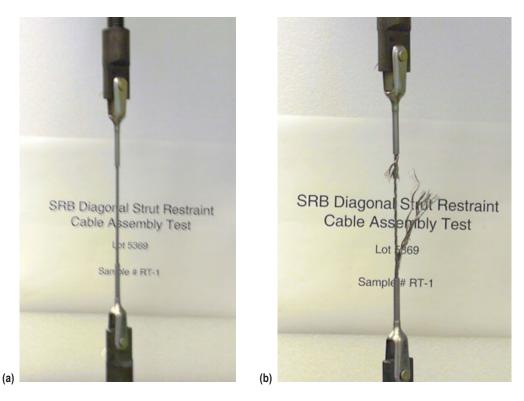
5369–RT–1 (a) before testing and (b) after testing.
